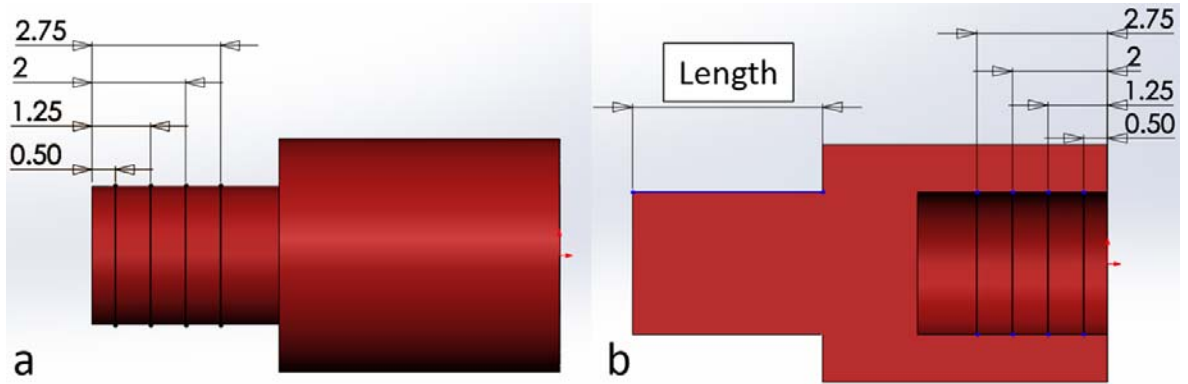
Aluminium dimensional artefact CMM measurement locations. (all dimensions in mm). Reproduced from [18].
